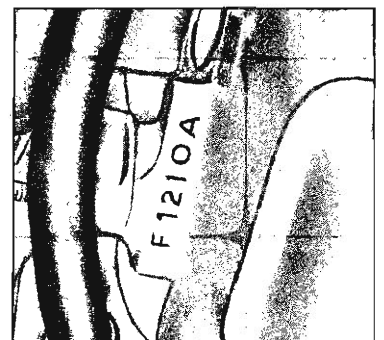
Eight Cylinder Engine Unit Number Located on Pad at Front, Right Hand Side of Cylinder Block
